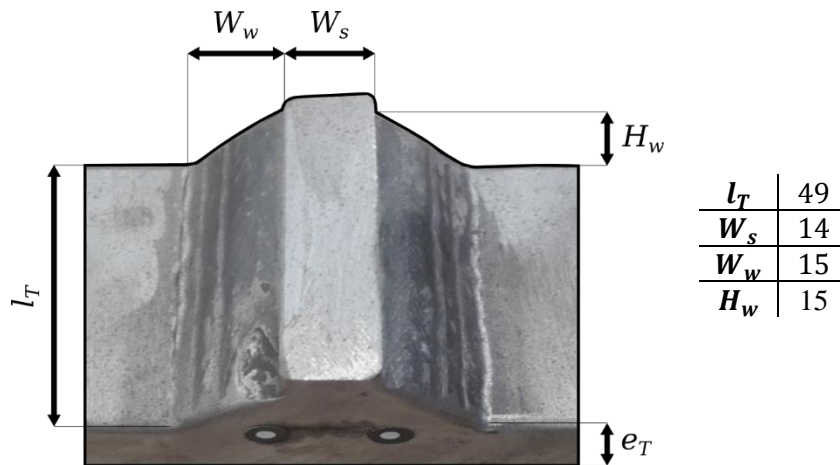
Welded T-joint dimensions (in millimetres)
